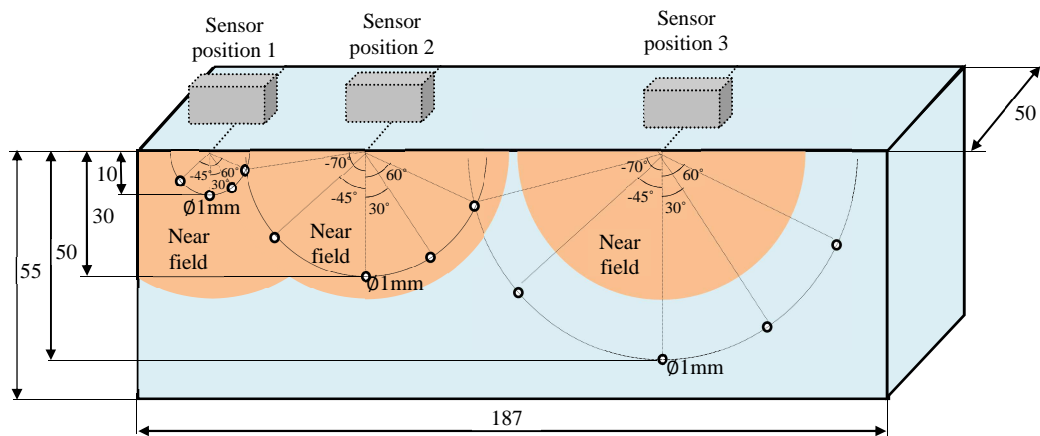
Dimensions of test specimen TK1, all numbers in mm. (Bulavinov, 2005).
